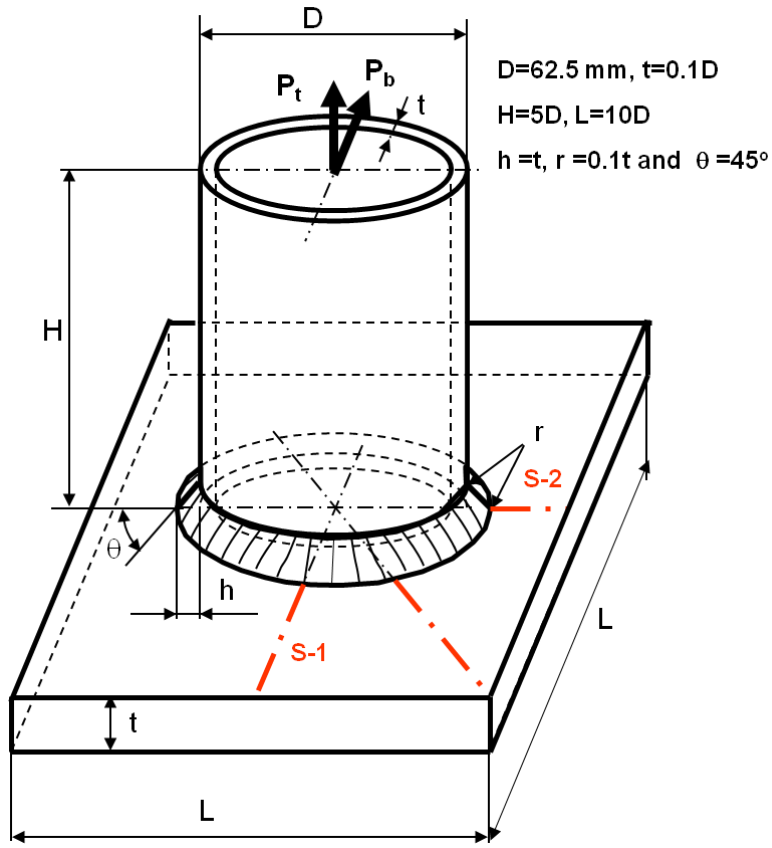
Geometry and dimensions of the tube on plate weld joint
